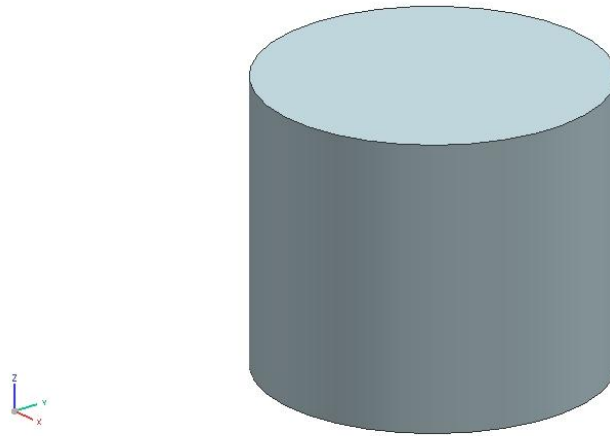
1. 3-D model of the squeeze cast cylindrical coupon.
